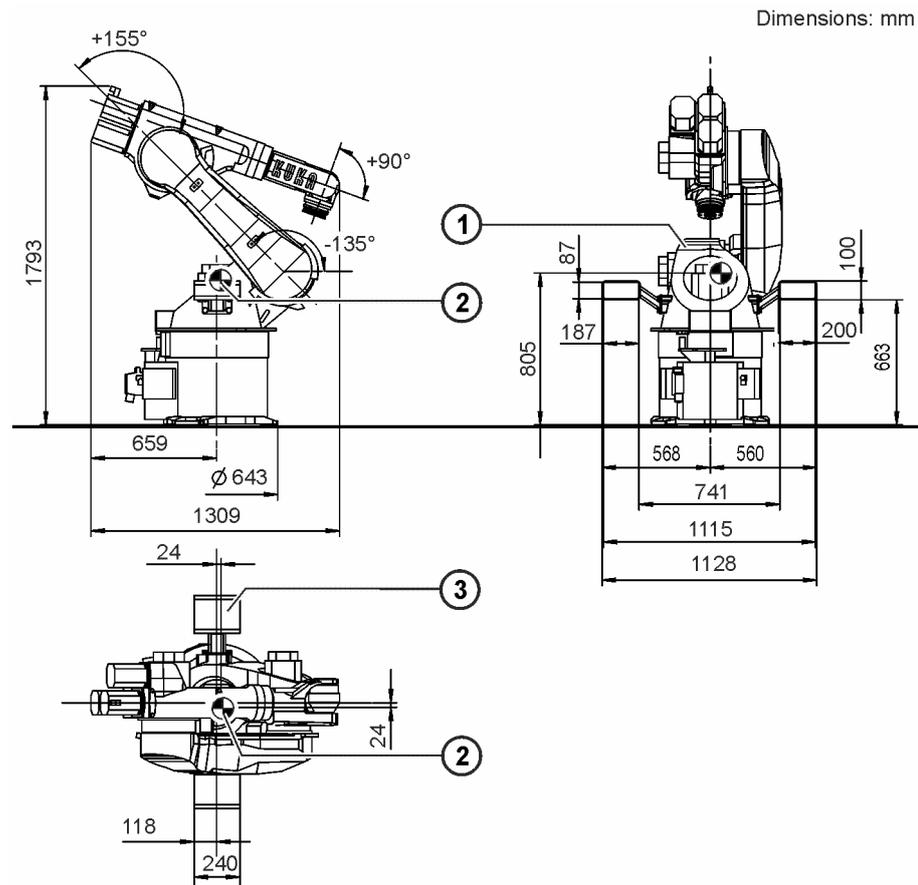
Transport dimensions, KR 60-3 floor-mounted robot
